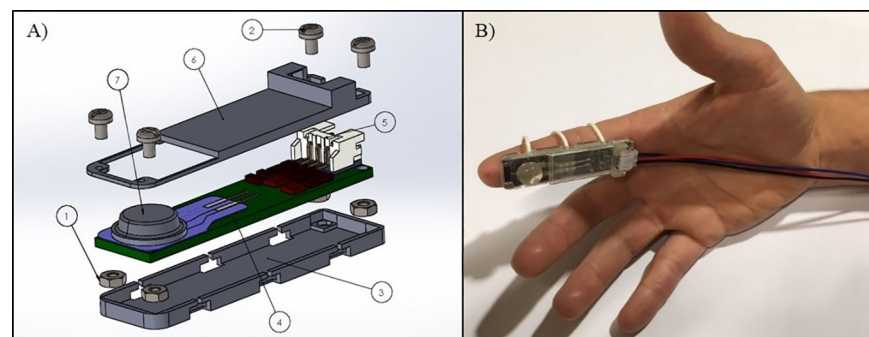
Sensorised finger device. A) 3D exploded CAD drawing of the casing for the device's printed circuit board: 1) Hex M1x0.7mm Nuts; 2) M1 screws 0.4x3mm; 3) Lower case; 4) Printed circuit board; 5) JST Connector that links the device to the SynAmps2; 6) Upper case; 7) A301 Flexiforce sensor + 3M Bumpon. B) Sensorised finger as worn by a user.
